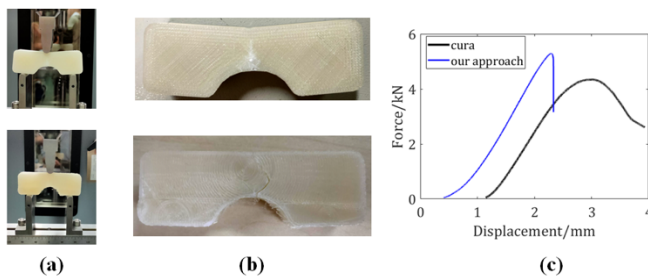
Three-point bending test for case 3: (a) test setup; (b) breaking pattern; (c) tensile strength.
